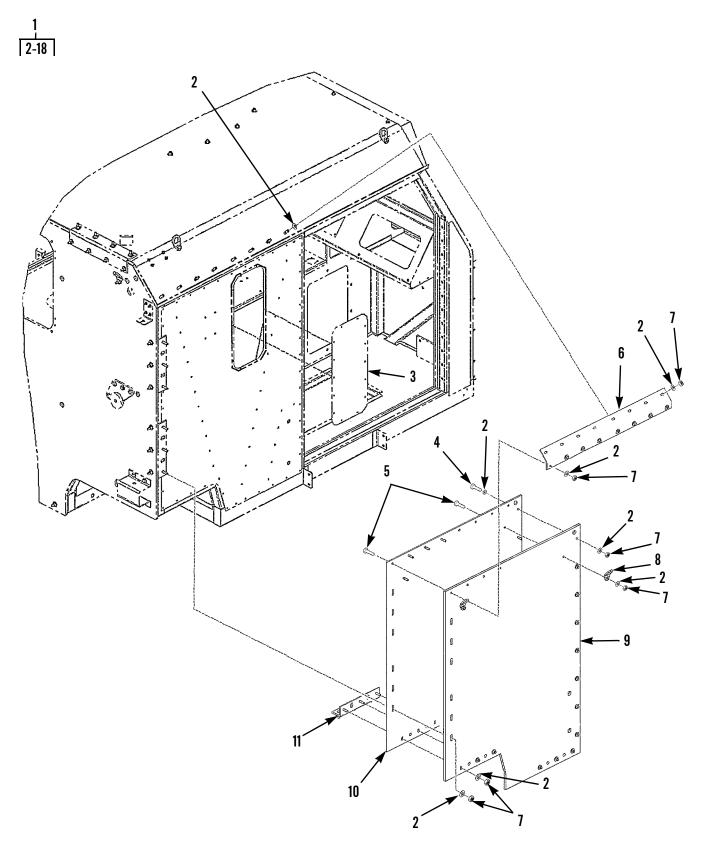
Right Side Panel Armor Kit and Mounting Hardware (Sheet 1 of 2)
